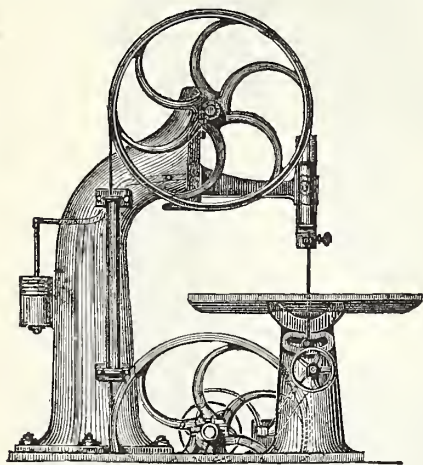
ROBINSON'S ENDLESS BAND-SAW MACHINE.
